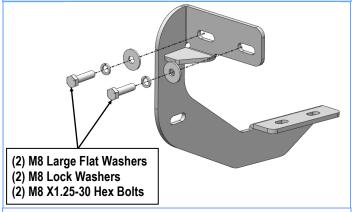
Attach the Bracket to Threaded End of the Bolt/Nut Plate
